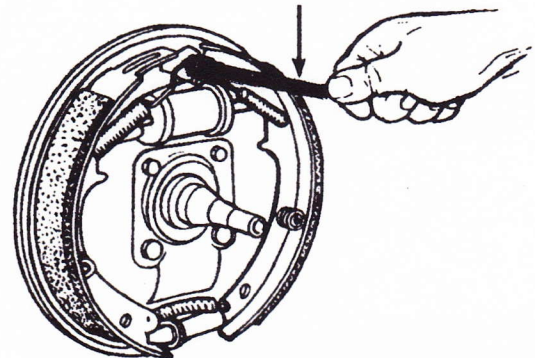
Using a spring removal tool to remove the return springs.
